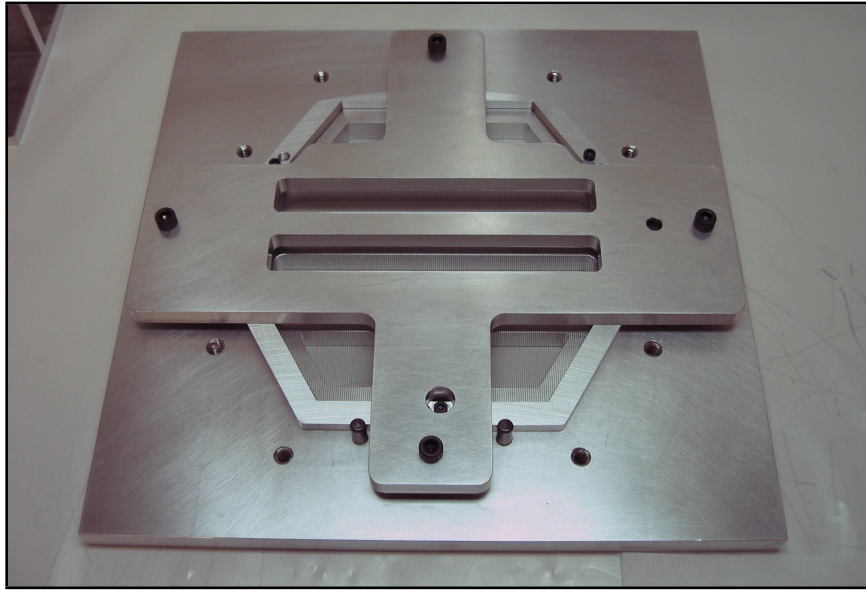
The bonding structure fully assembled. On bottom is the bonding plate, a piece of aluminum cut to precision flatness ($\pm 0.001''$). The wire-grid plate is placed on top this plate and its frame lowered onto the epoxy beads. The top cross structure is bolted down with minimal force to provide a clamp to promote a good epoxy bond.
